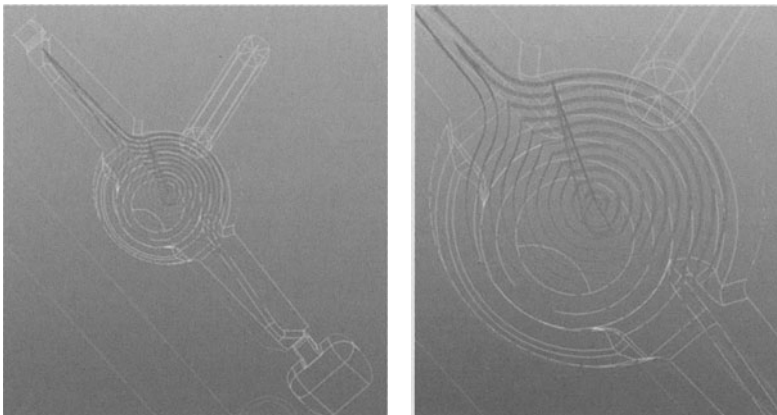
Conventional milling toolpath, time (first tool) = 5.5 min
